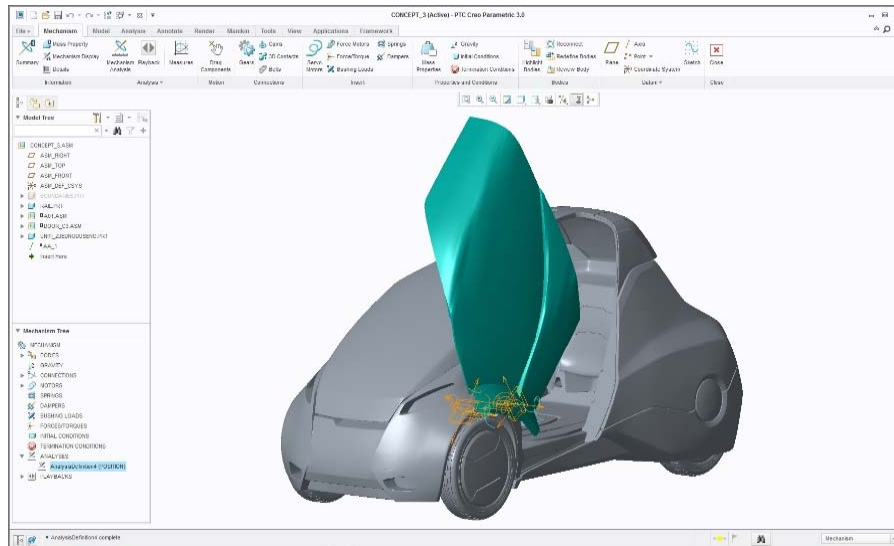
Final kinematic assembly of door mechanism in PTC Creo Parametric environment
